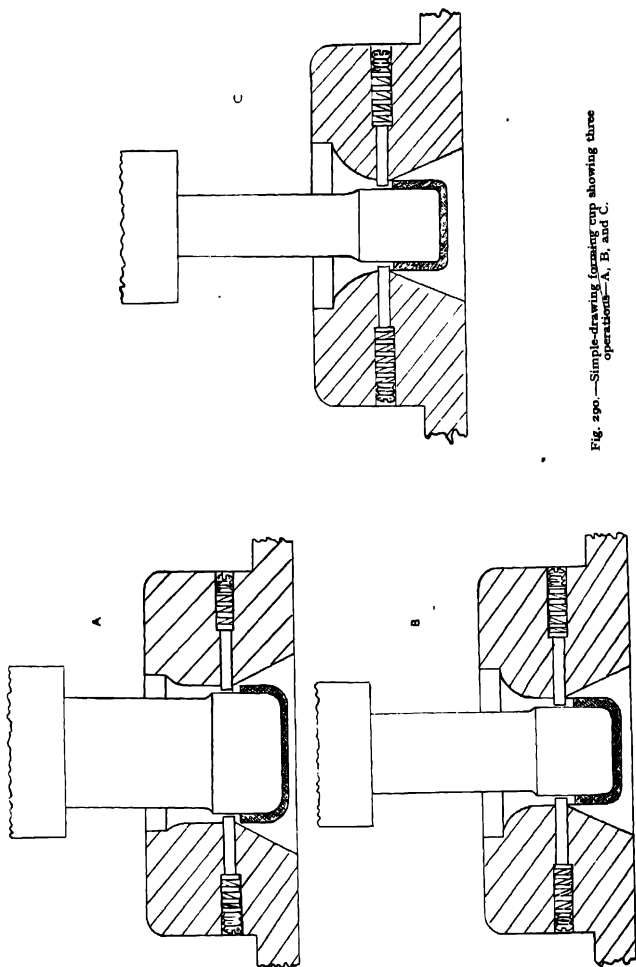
Simple-drawing furnace cup showing three operations—A, B, and C.
